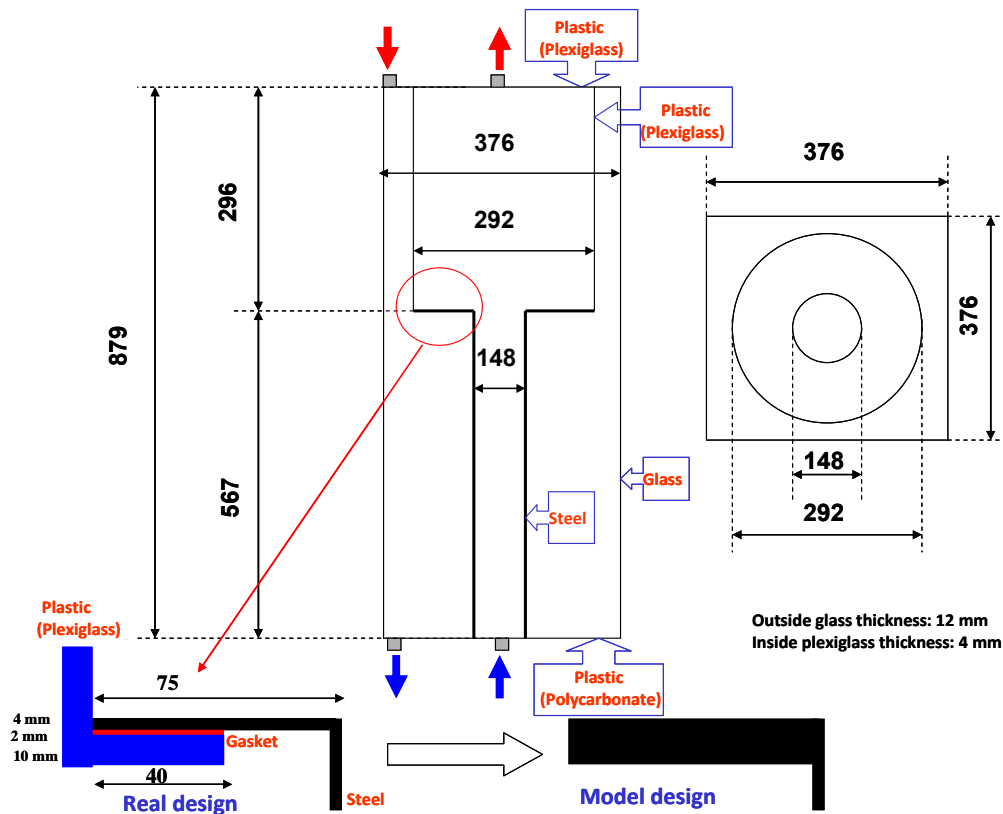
Tank-in-tank heat storage dimensions. The dimensions are inside diameter.
